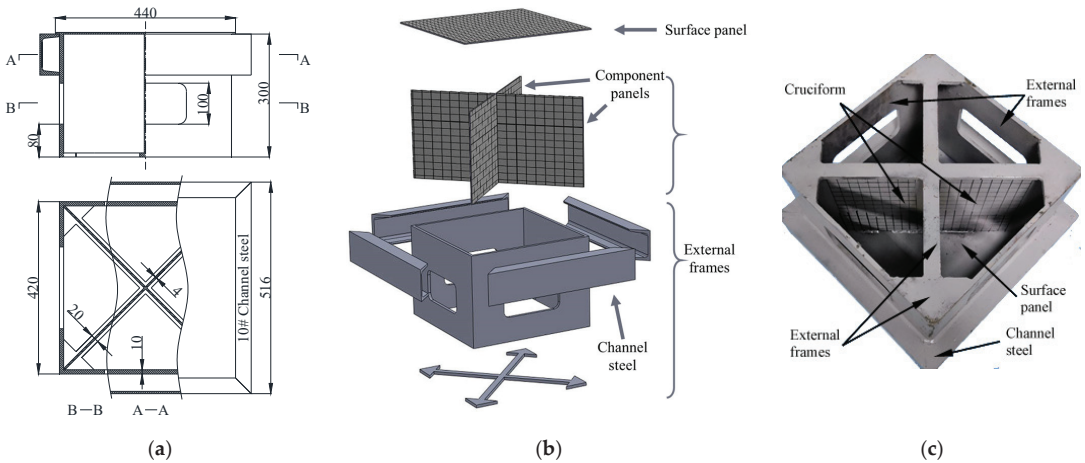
(a) The geometric dimension, (b) the exploded view, and (c) the bottom view of the specimen.
